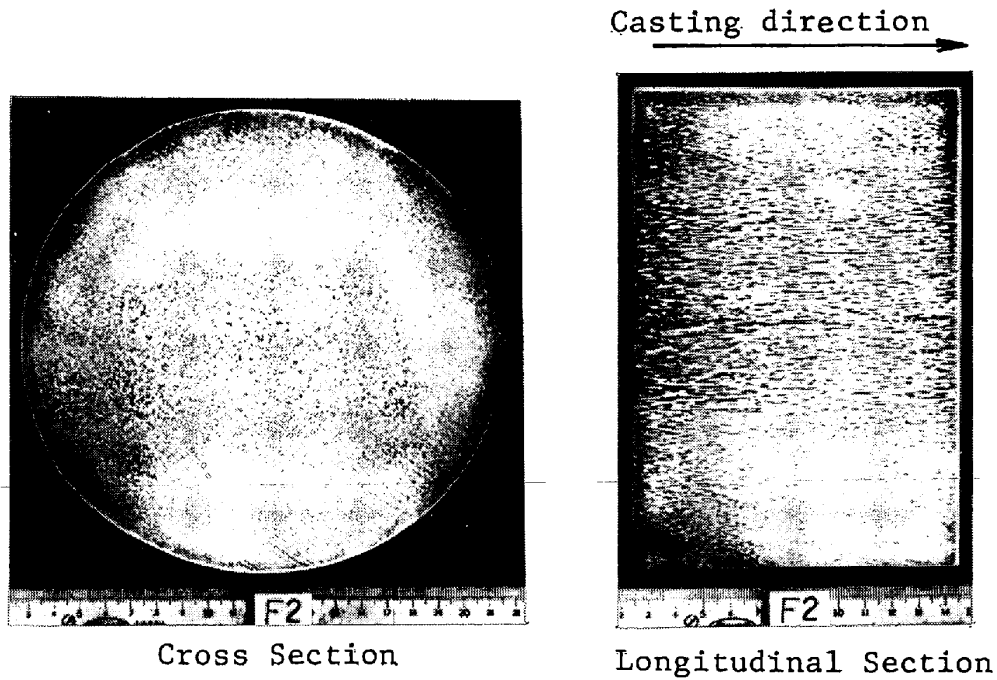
Dendrite etch of rolled tube round. (Sample from the same heat as Photo. 1)
